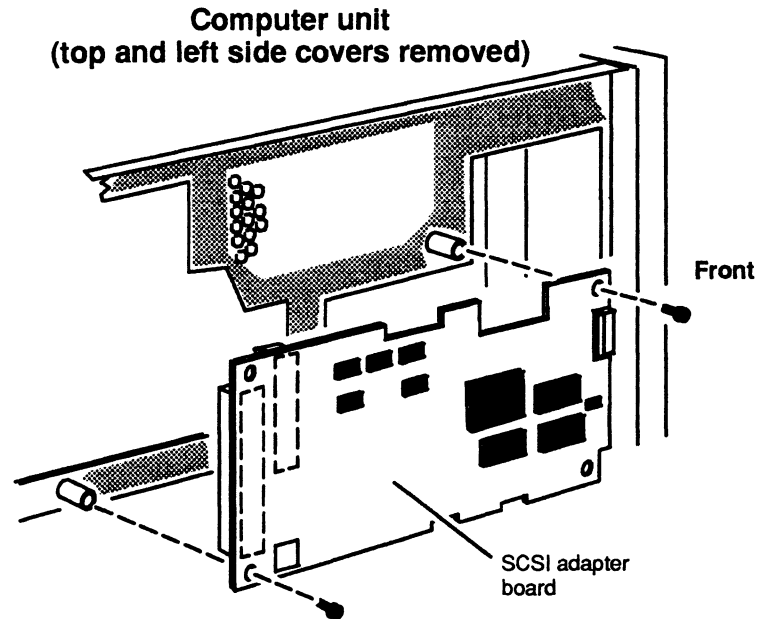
Removing or Installing the Screws that Attach the SCSI Adapter Board to the Computer Unit
